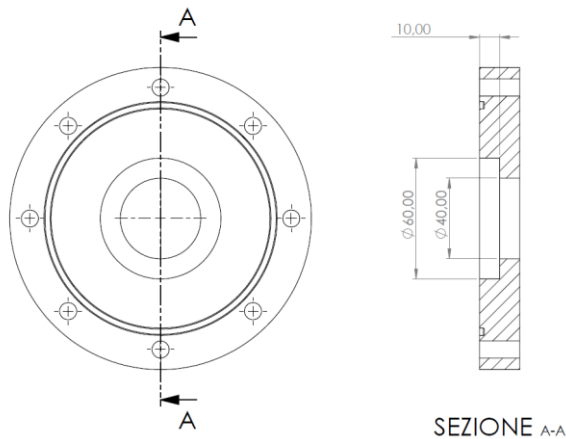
Section view of the Nozzle Plate drawing (simplified version). Dimensions in millimeters.
